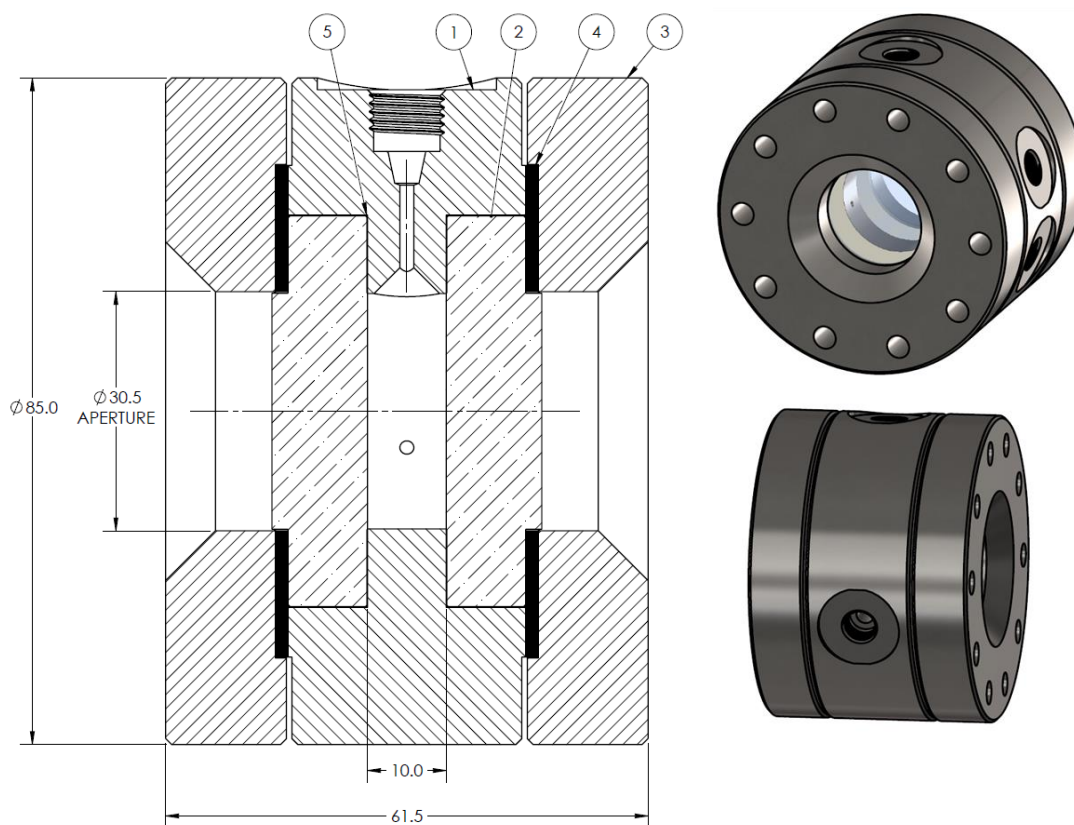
Left: Technical drawing of cell's vertical cross section (dimensions in mm) and Right: Isometric views of the cell
